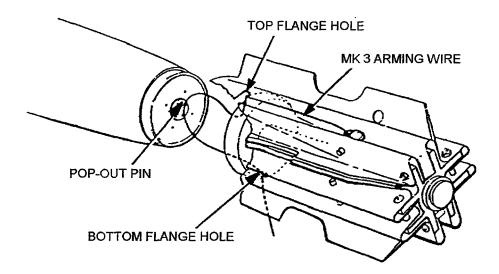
B. Arming Wire and Fin Mk 15 Removal
